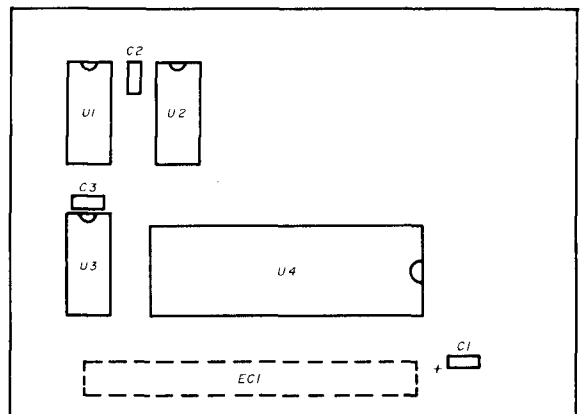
Component layout for interface circuit — view from component side (EC1 mounted on FOIL SIDE).
